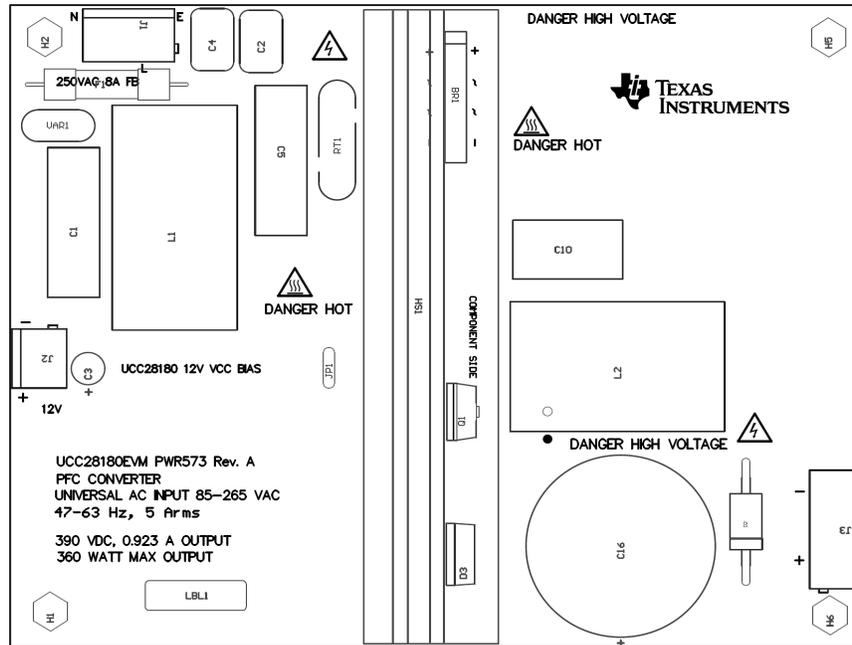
UCC28180EVM-573 Top Layer Assembly Drawing (top view)
